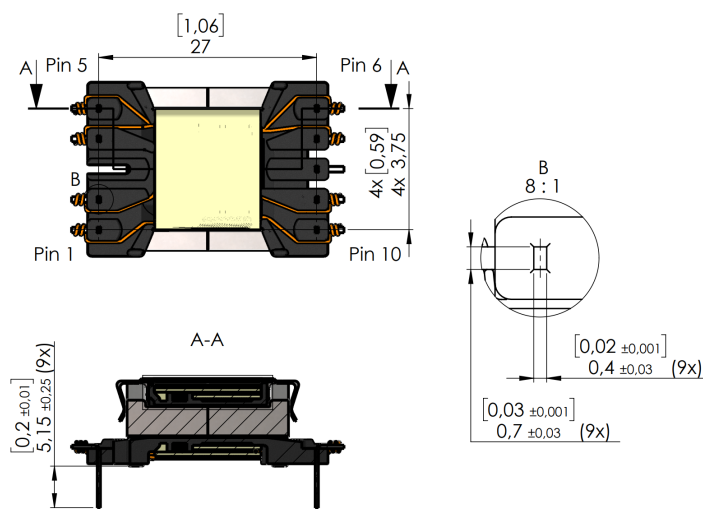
Transformer terminations, bottom view (dimensions in mm [inch]).
